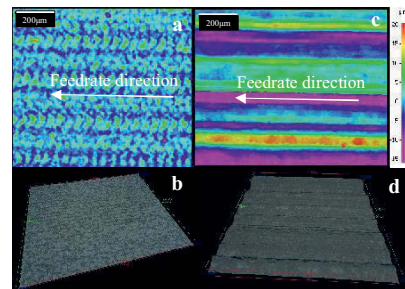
EN-LY2 couple milled surfaces at 1000mm/min
